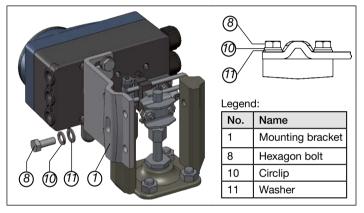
Attach Type 8792/8793 with mounting bracket; for actuators with cast frame
